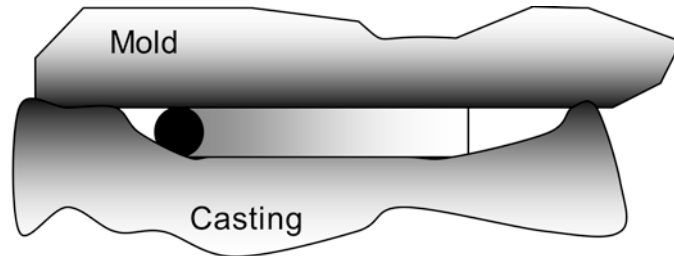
Sketch of the thermocouple bead position at casting interface.
